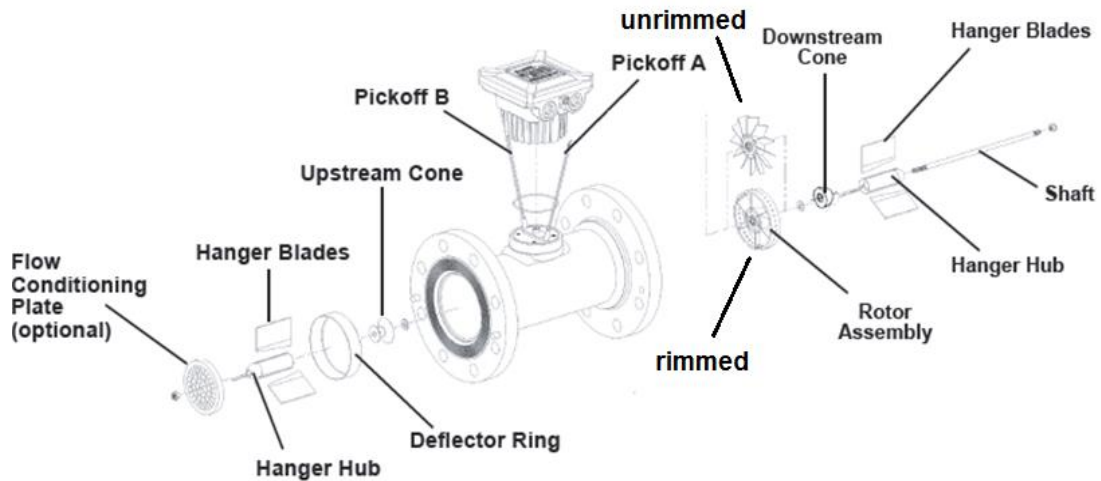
Assembly of a Liquid Turbine Meter with Rimmed or Un-Rimmed Rotor.
